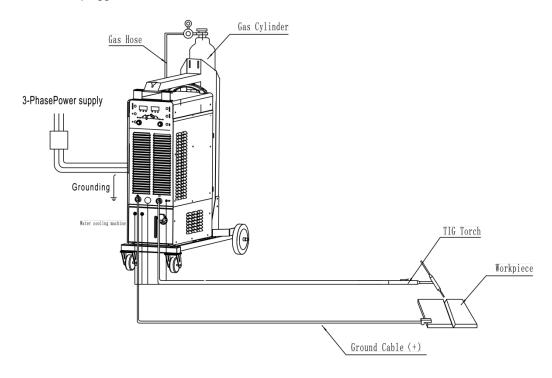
Connection and operation for gas-cooling TIG welding
